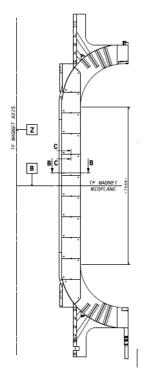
ILIS panels assembly layout (all dimensions are in mm).
